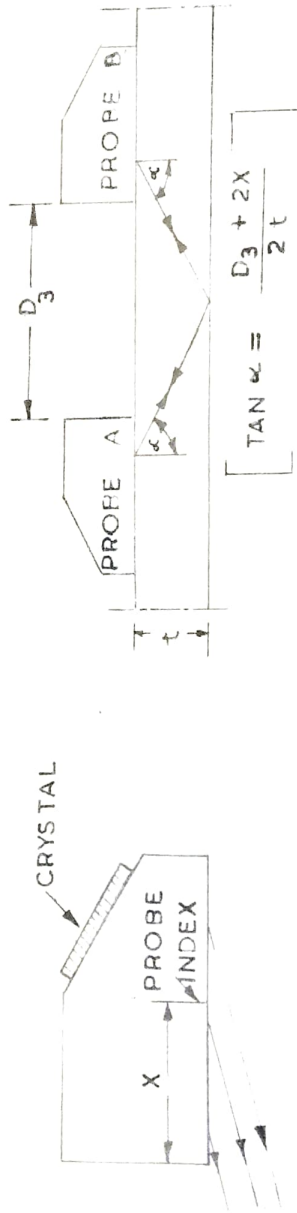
ENLARGED VIEW OF PROBE INDEX
